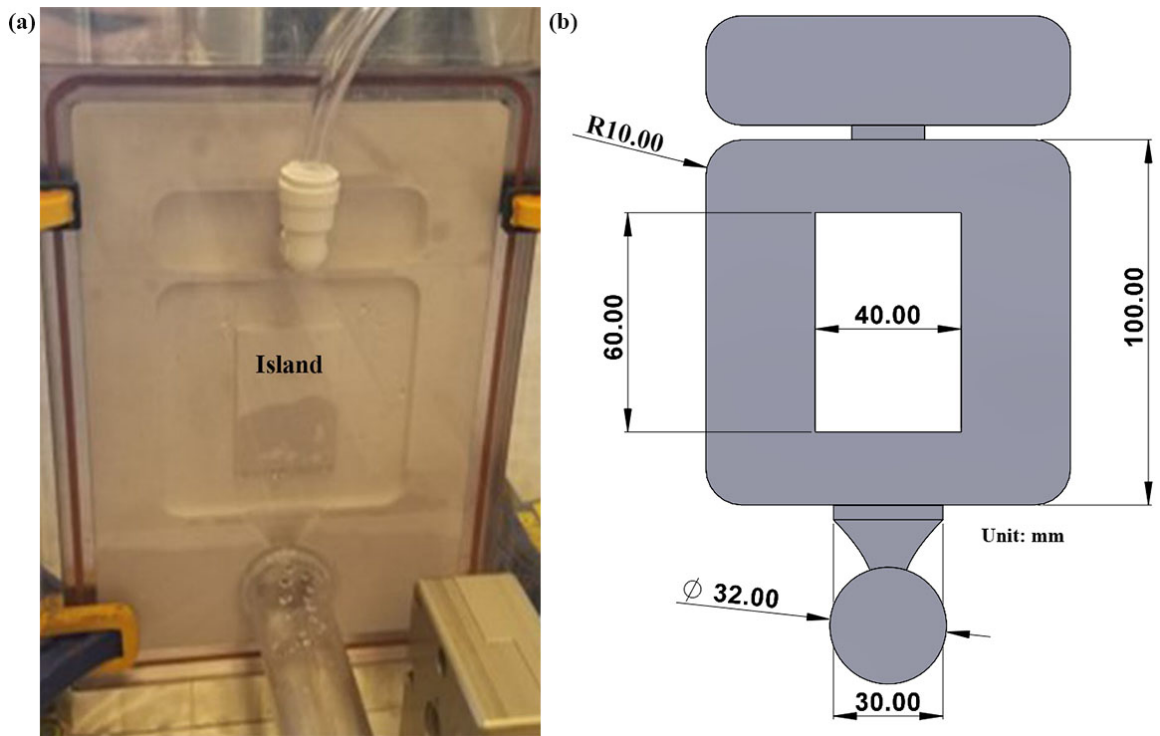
The rectangle die is depicted as follows: (a) showcasing the 3-D printed die within its holder, and (b) presenting the die with major dimensions labeled, thickness is 5 mm.
